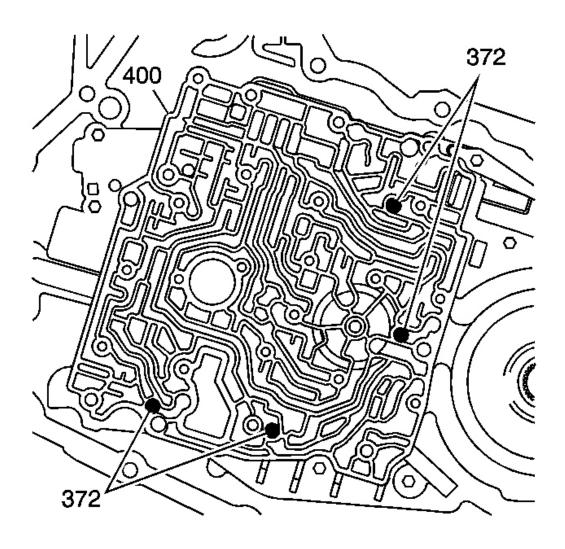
Locating Ball Check Valves In Case Cover Courtesy of GENERAL MOTORS CORP.
